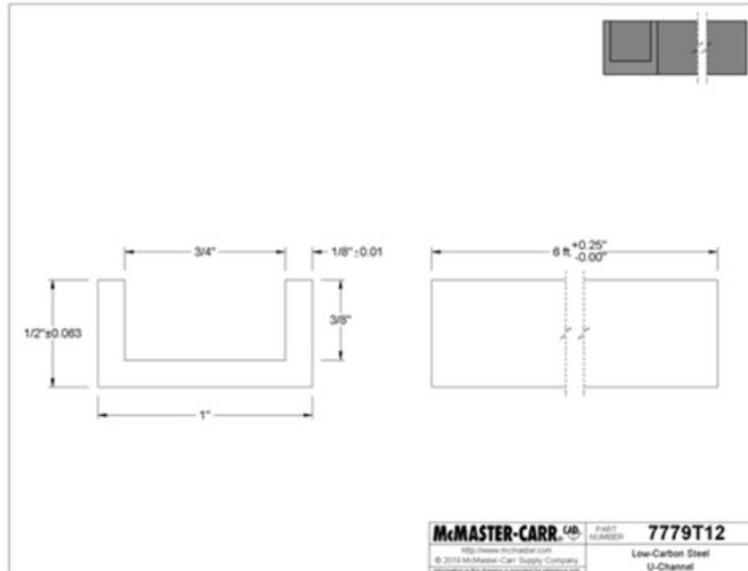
Mild steel c-channel shop drawings (McMaster part number 7779T12 or equal)
